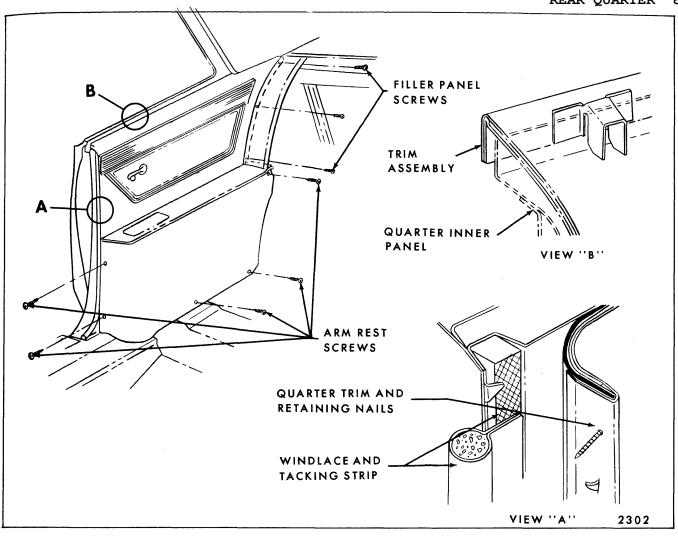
Rear Quarter Trim Assembly (Hang-On Type)
